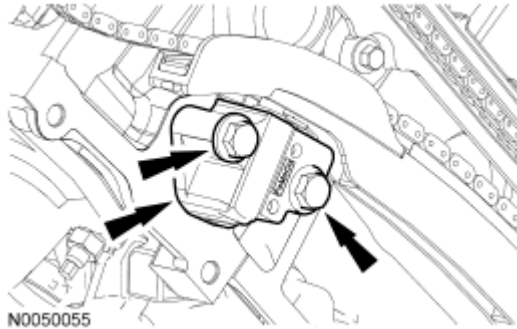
Locating RH Primary Timing Chain Tensioner Bolts
